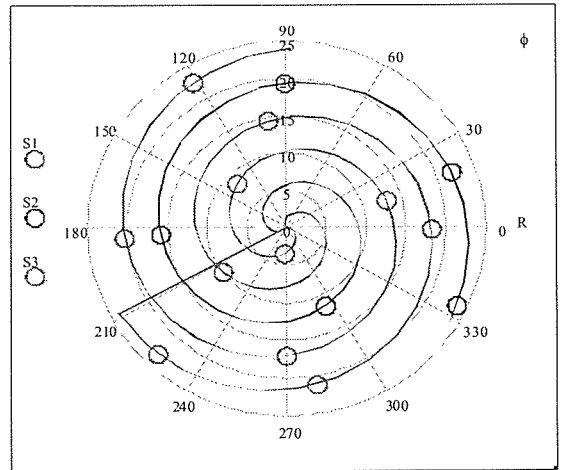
The design of cutting edge holes distribution on the bowl cutter surface
